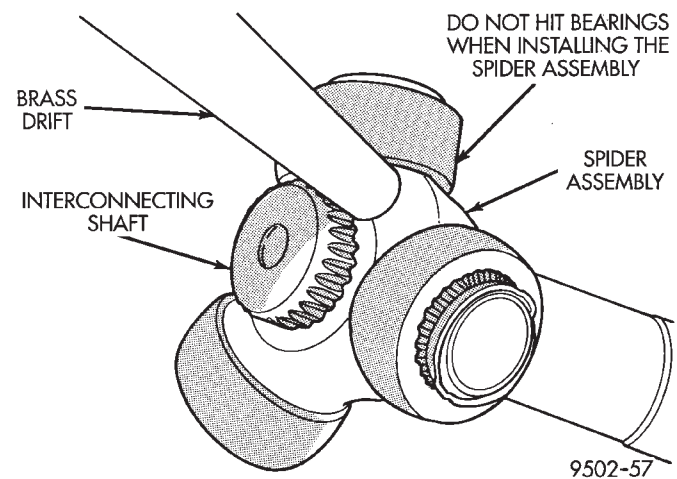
Installing Spider Assembly on Interconnecting Shaft
